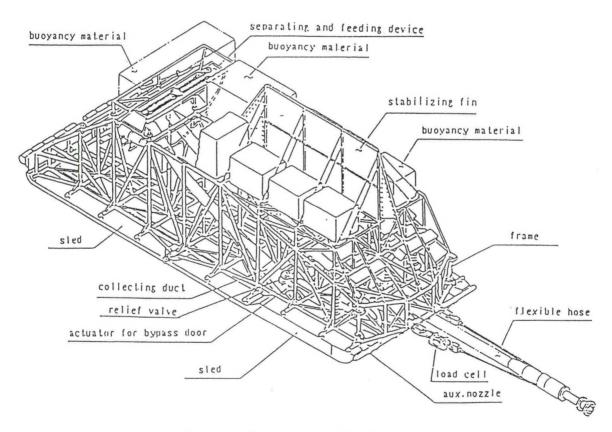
BIRD'S EYE VIEW OF THE MINING COLLECTOR
